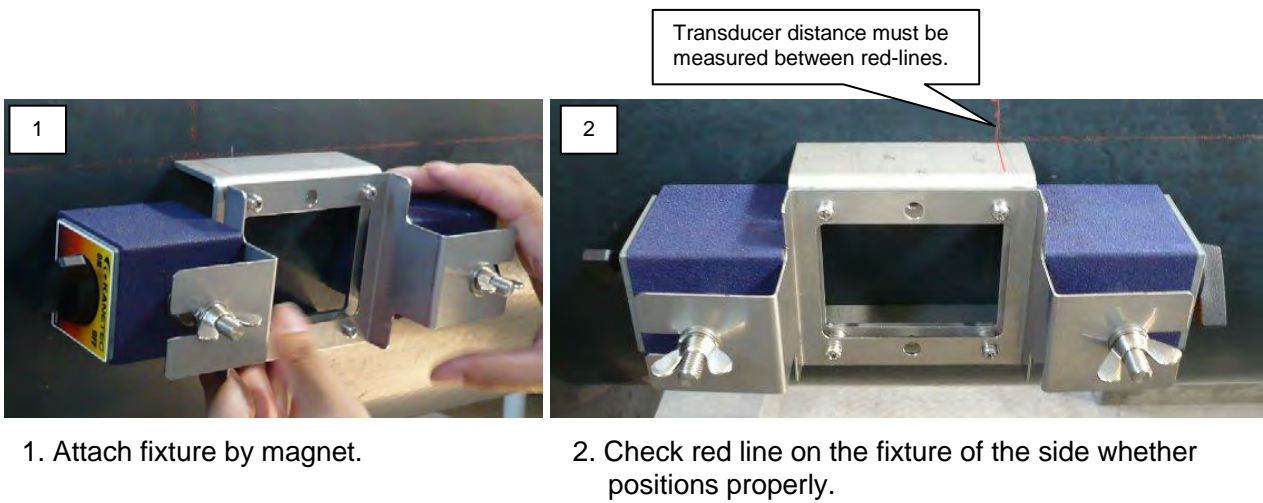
Set the mounting fixture with the magnets
